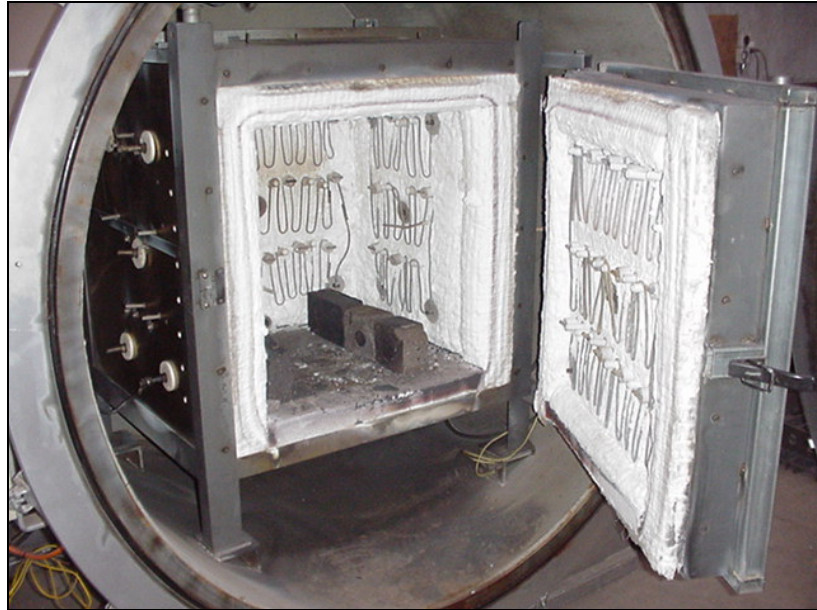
Internal view of heating elements and hot zone of hot wall vacuum furnace
